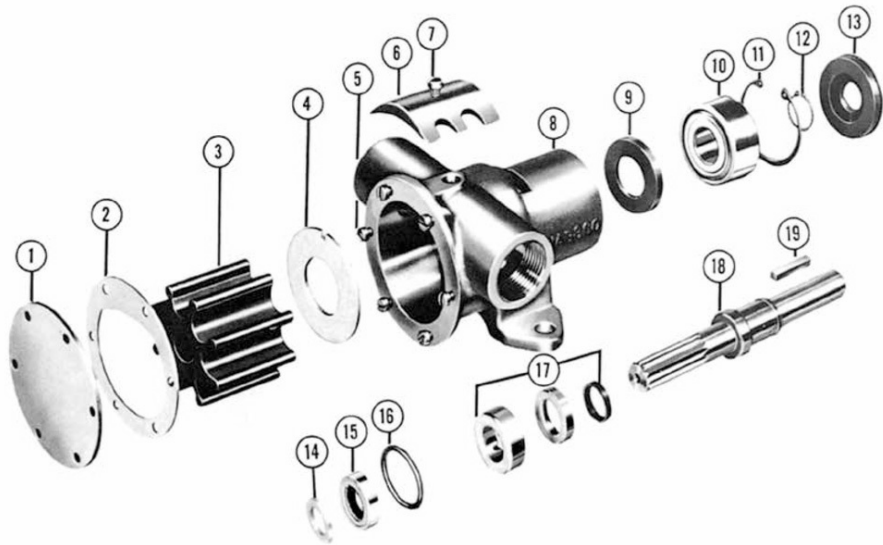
An exploded view of the pump shown in [Figure 13-14](#). Pump cover (1). Gasket (2). Impeller (splined type; 3). Wear plate (4). Pump cover
